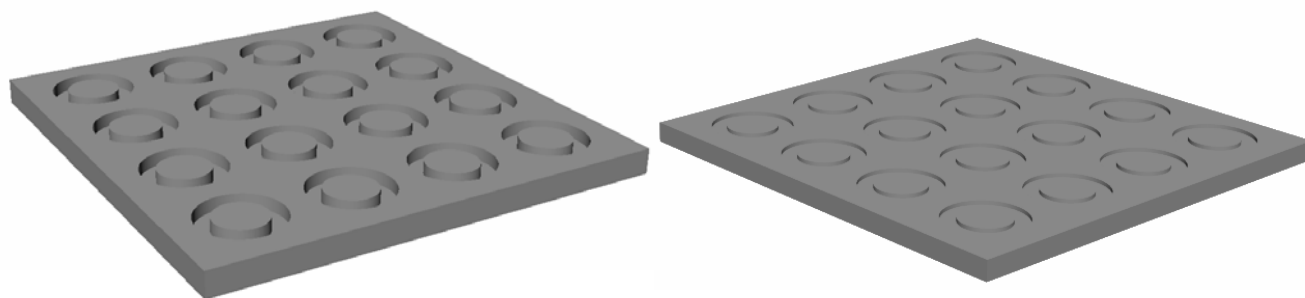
3D schematics of batch fabrication molds used in the fabrication of lens containers. These molds were 3D printed using stereolithography.;
